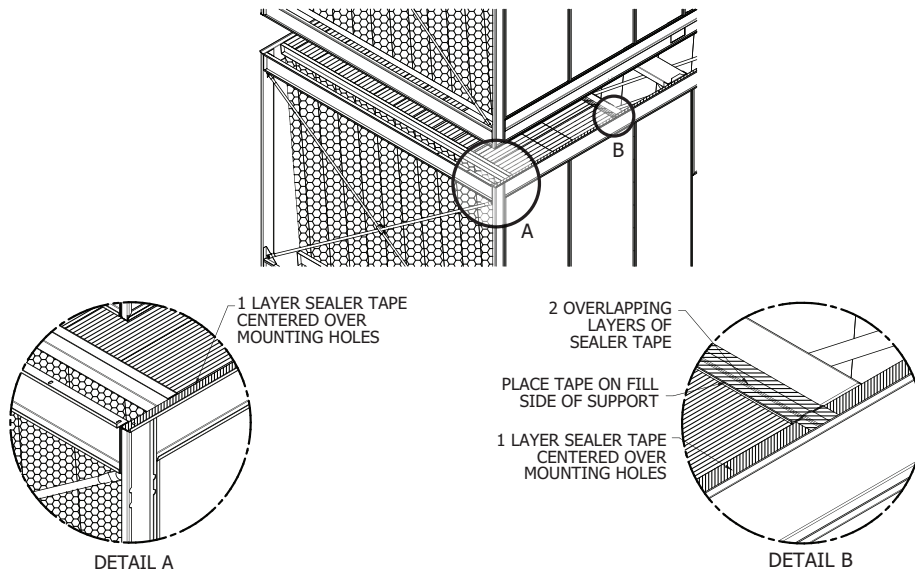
AXS Double Stack Sealer Tape and Bolting Detail
